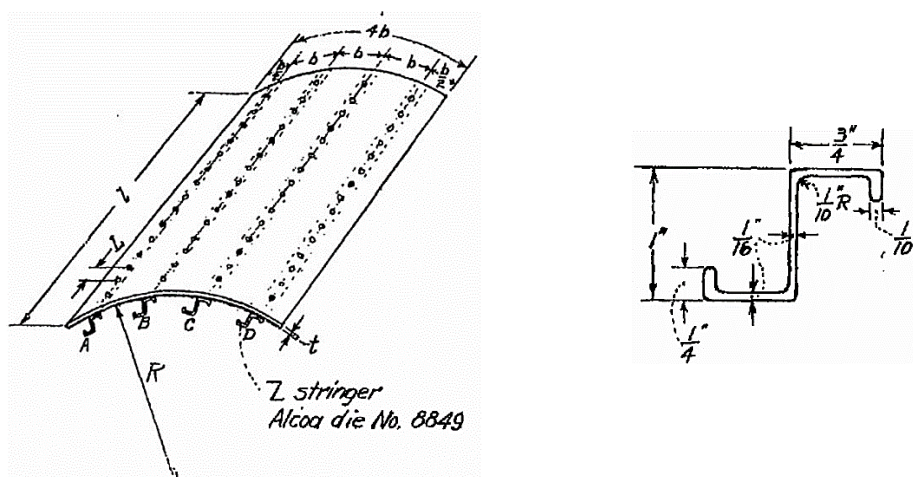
Test specimens from Ramberg *et al.* [103] (dimensions in inches)
